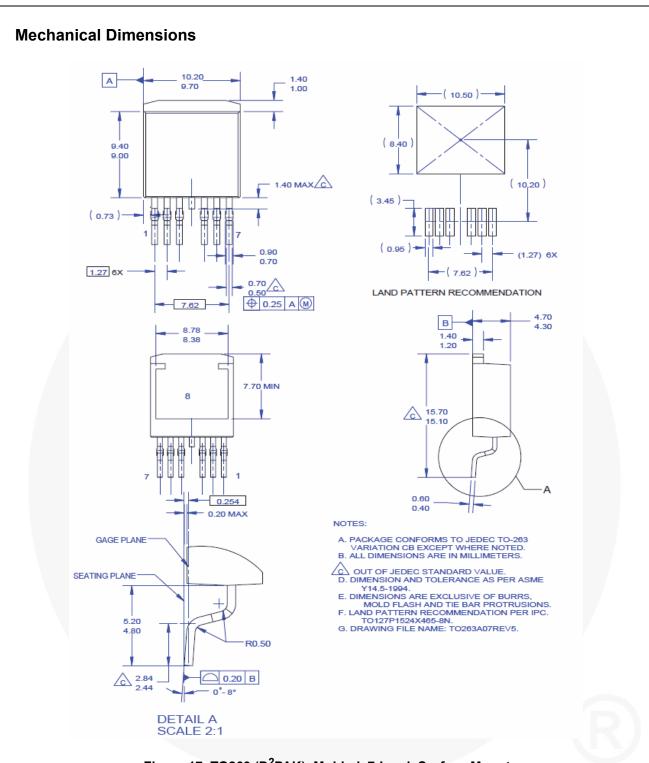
TO263 (D²PAK), Molded, 7-Lead, Surface Mount
